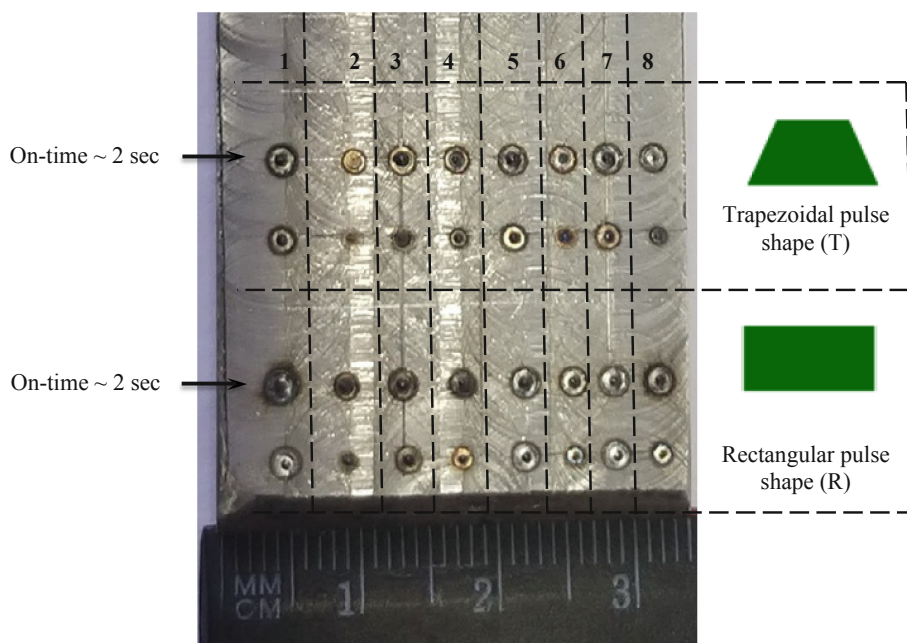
The St3 steel coupon after laser stake welding. *Source:* Prepared and compiled by the authors
